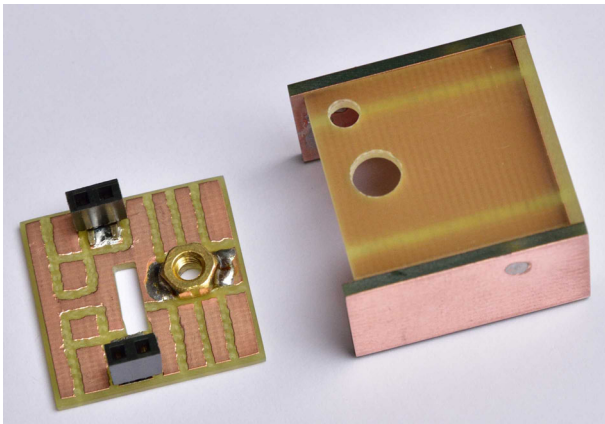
Base-plate on the left and "U" assembly with cover-plate on the right.
